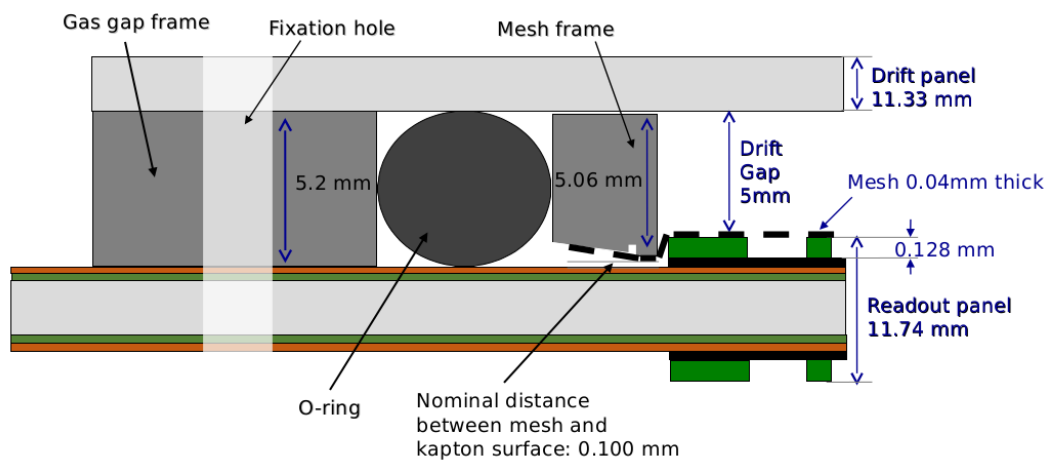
Assembly of a readout panel and an external drift panel. Not to scale.
